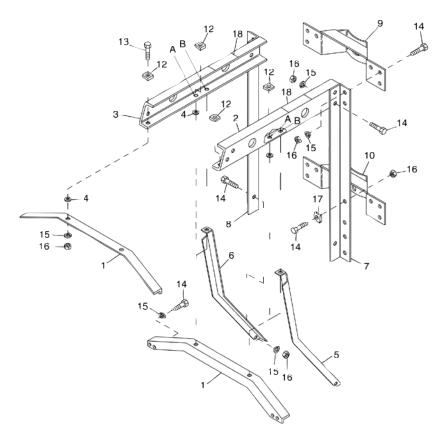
Exploded view and parts list for KA146W5 pole-mounting hanger.
